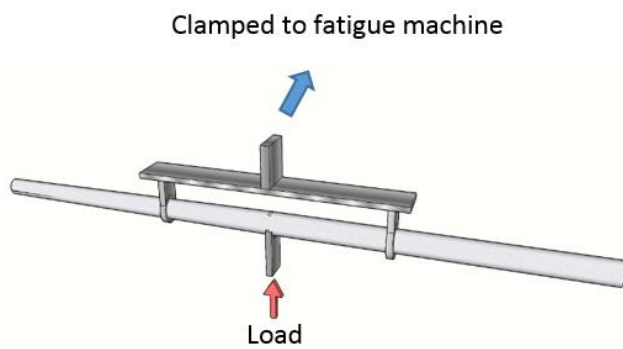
Steel frame combined with fatigue machine for three-point bending fatigue test
